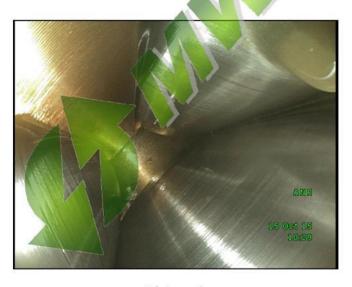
shows bearing position no. 6, the bearing of the low speed shaft at rotor side. Small indentations visible at the raceway.
